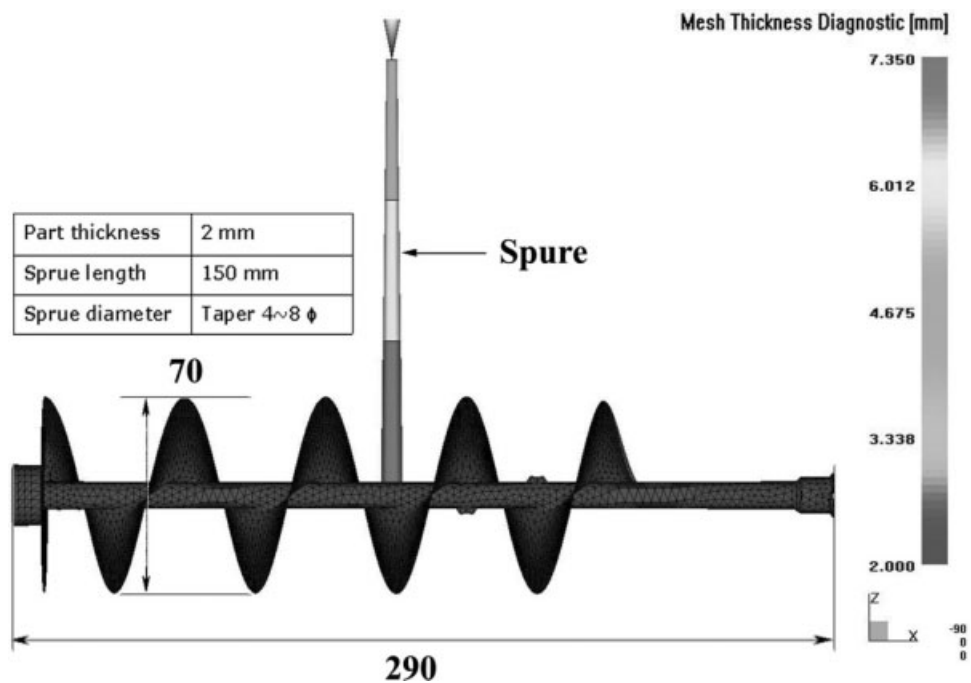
Single cavity mold with the direct sprue gating into screw part.
